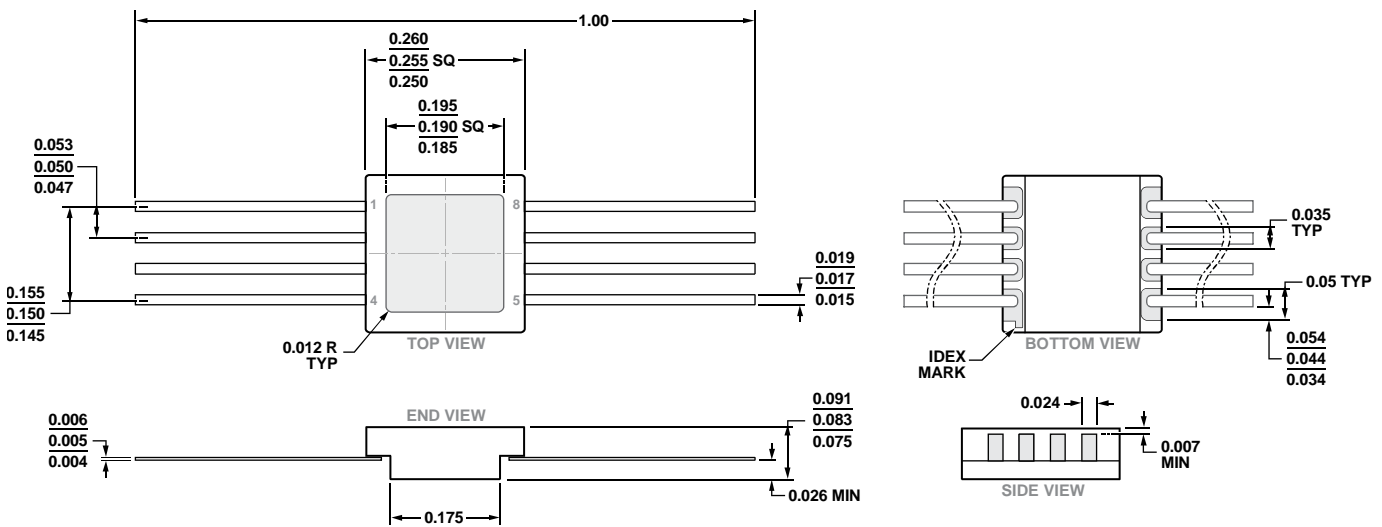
8-Lead Ceramic Flat Package [FLATPACK]
